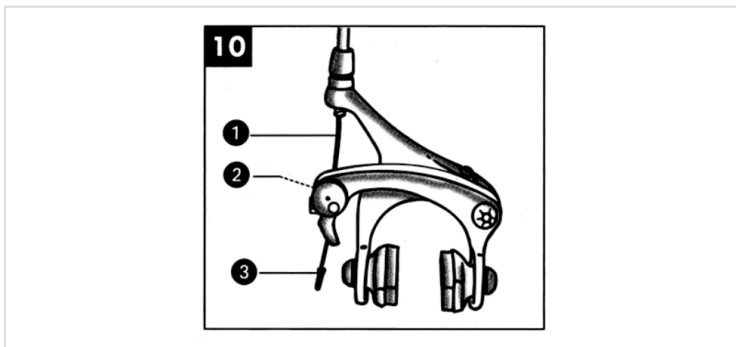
1 cable · 2 nut (rear) · 3 pull the cable
